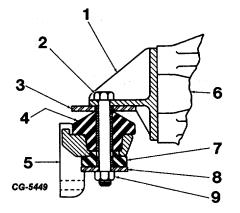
Engine Rear Mounting with Two-Piece Insulator
